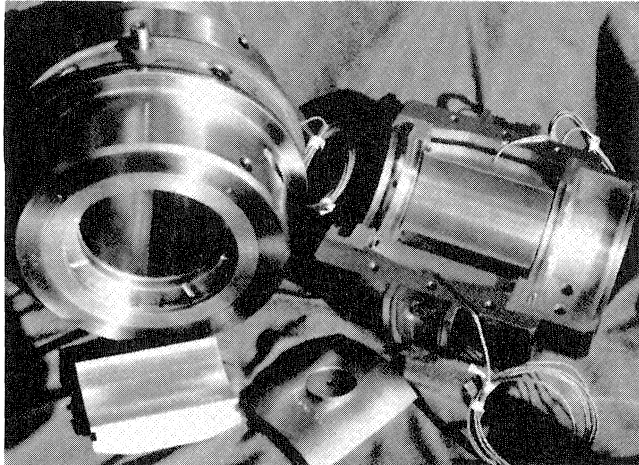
New Tilt Pad Journal Bearing—Four Pad Design.
